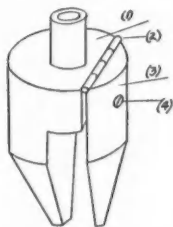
Essential parts of the chuck described in Abstract 40: 1, main body which may be fastened to the stem of C-clamp; 2, hinge; 3, movable section held in position by the screw; 4, compression spring between the main body and the movable section.
